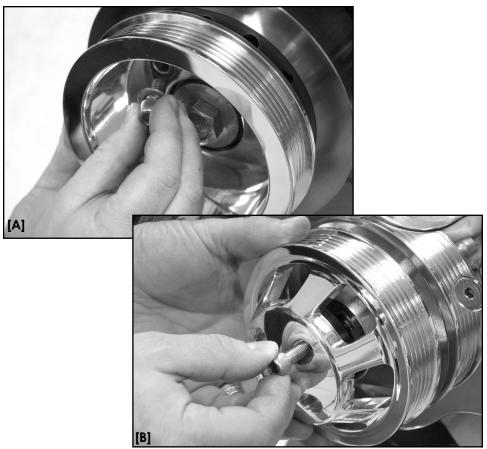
Install Crankshaft & Water Pump Pulleys
